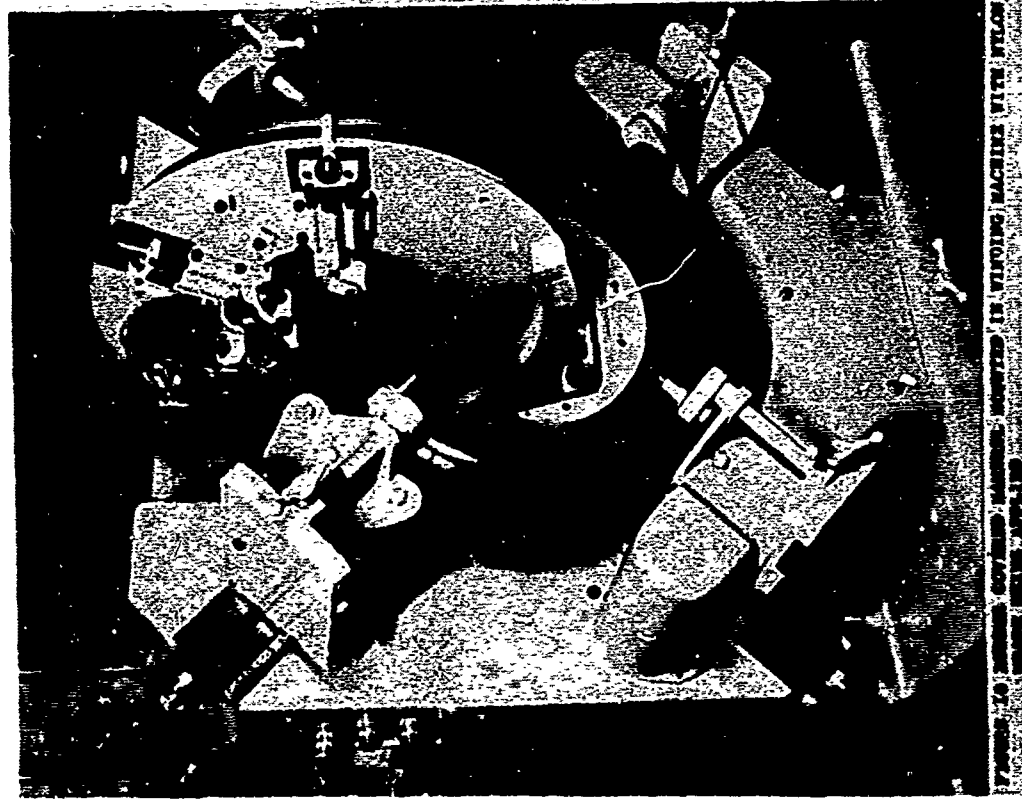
WIRE MACHINE. WIRE MACHINE IS WINDING MACHINE WITH WIRE
